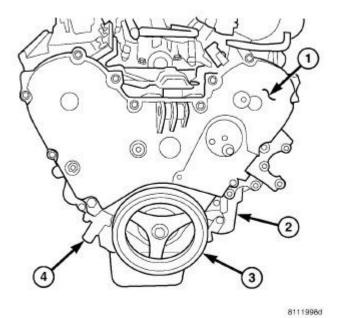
Front Timing Belt Cover, Engine Oil Filter, Vibration Damper & Timing Belt Tensioner Courtesy of CHRYSLER LLC
